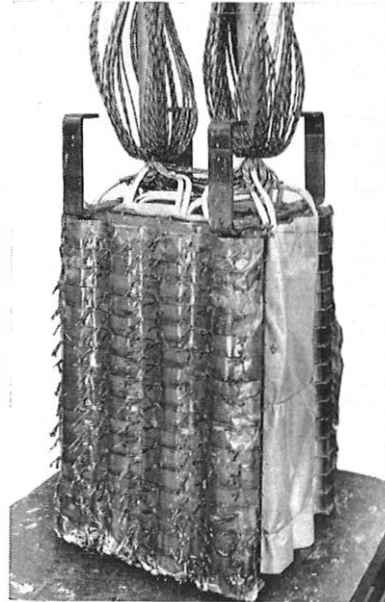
LOADING-COIL ASSEMBLY WITH STUB CABLES CONNECTED DIRECTLY TO LEAD-OUT WIRES
